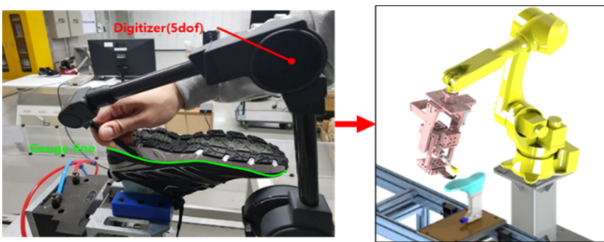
Example of the proposed automation process of drawing a gauge line with the 3-D device (left) and gluing (right)
